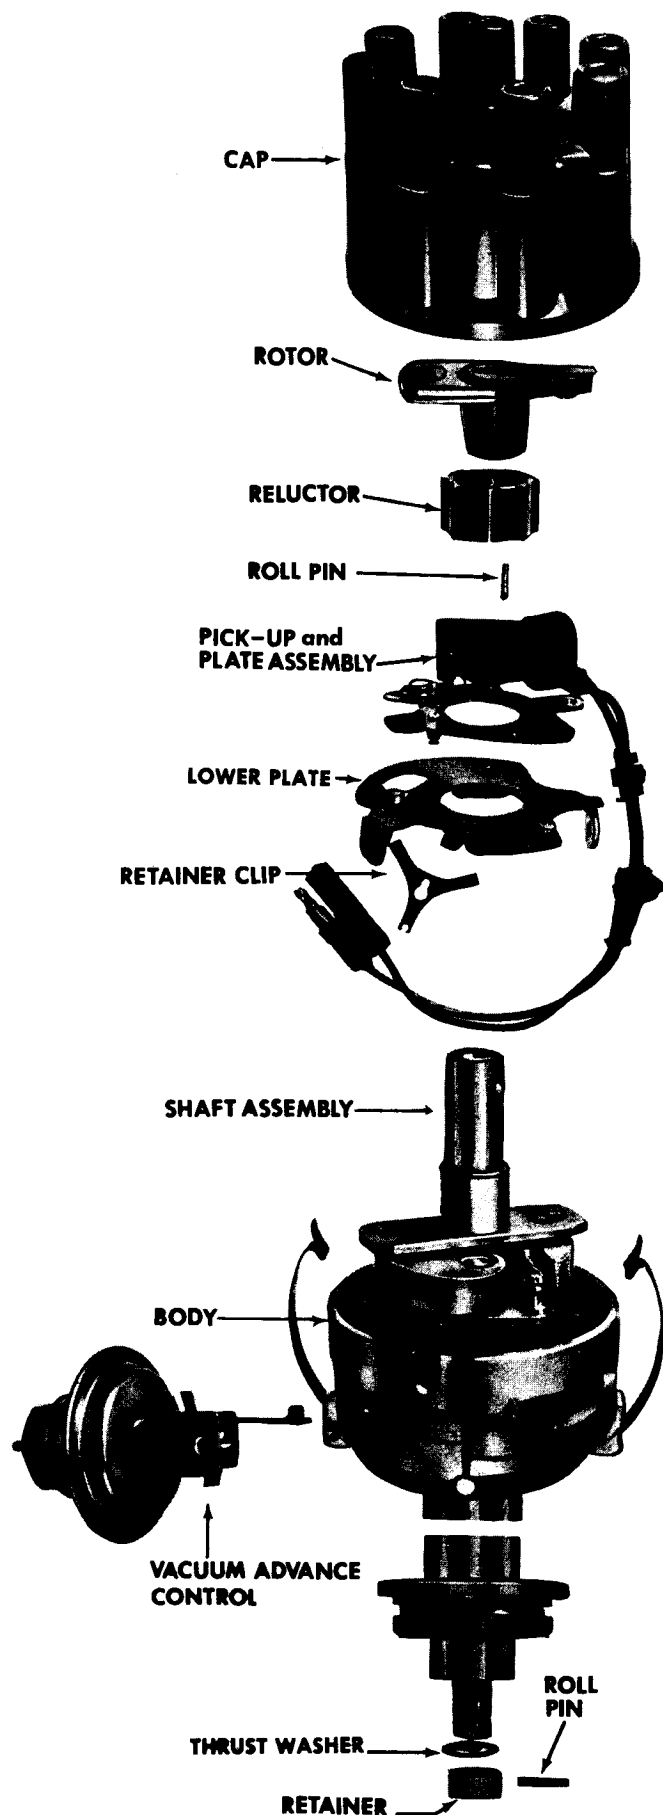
EXPLODED VIEW DRAWING (8 Cylinder)
